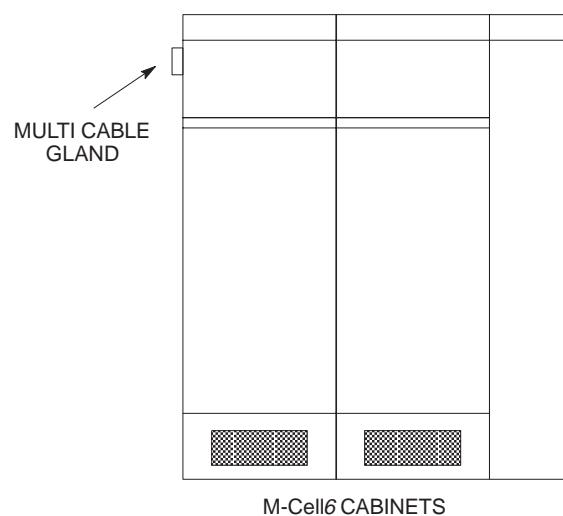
Location of the snap-in multi cable gland and mounting plate in the M-Cell6
